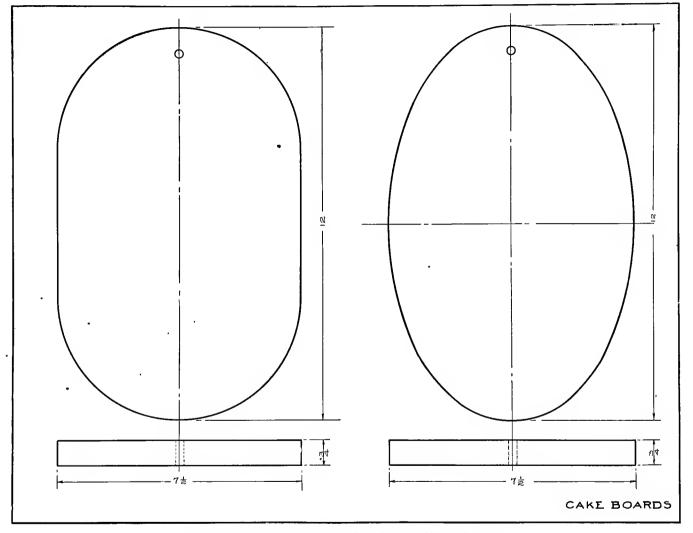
Working Drawing of Cake Boards (Sixth Grade)
